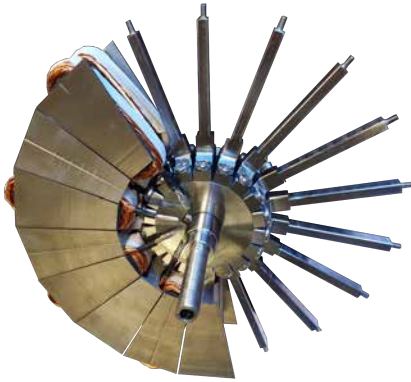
Assembling the stator of the ferrite magnet SAT PMLDC motor.
